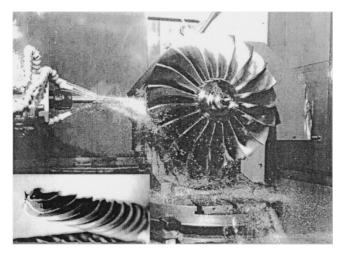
Machining of the compressor and the cutting tool used in example 2
